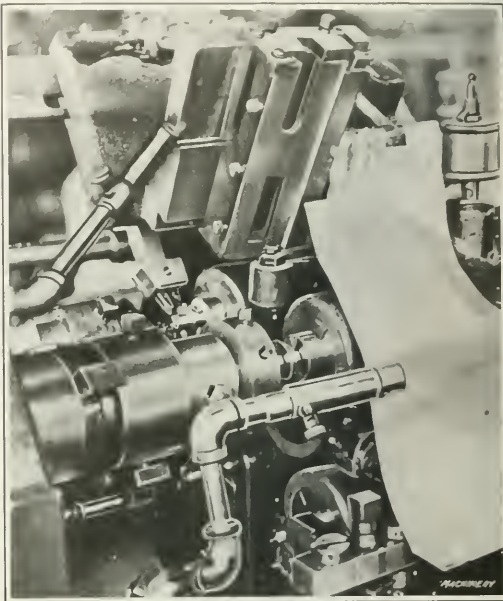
Set-up on No. 55 Acme Multiple-spindle Automatic Screw Machine for machining Fuse Cap
